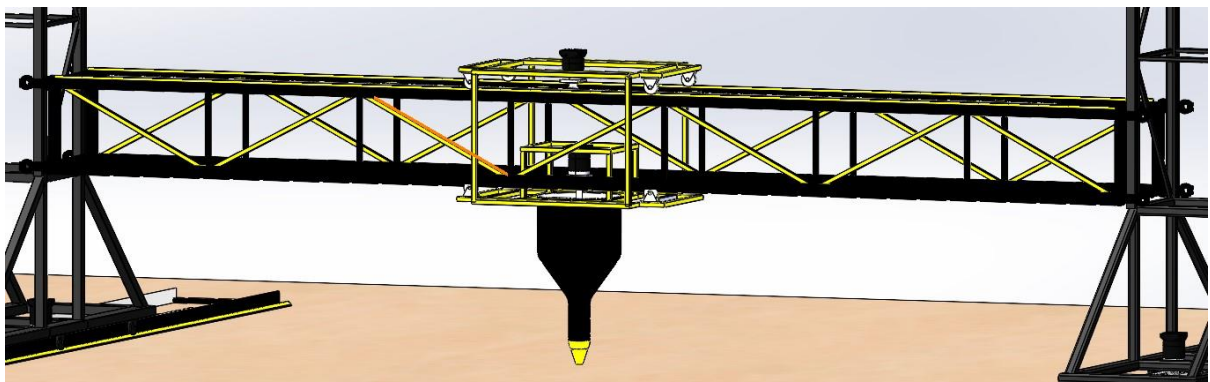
X-axis horizontal beam and extrusion unit on design.
